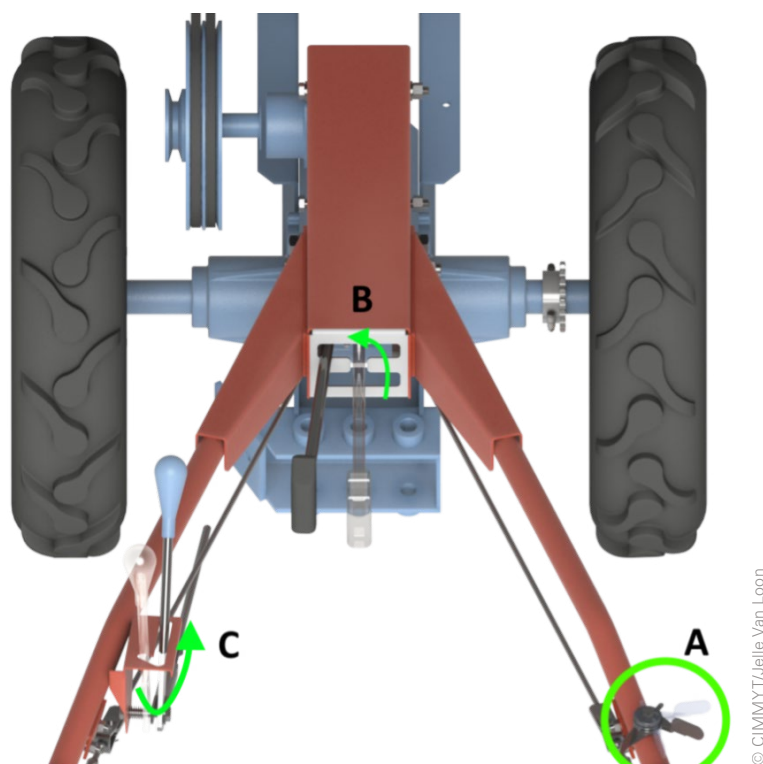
Handle bars components and actions to set 2WT in operation, with (A) accelerator and throttle positions, (B) shifting gear stick in first gear, and (C) engaging the clutch
